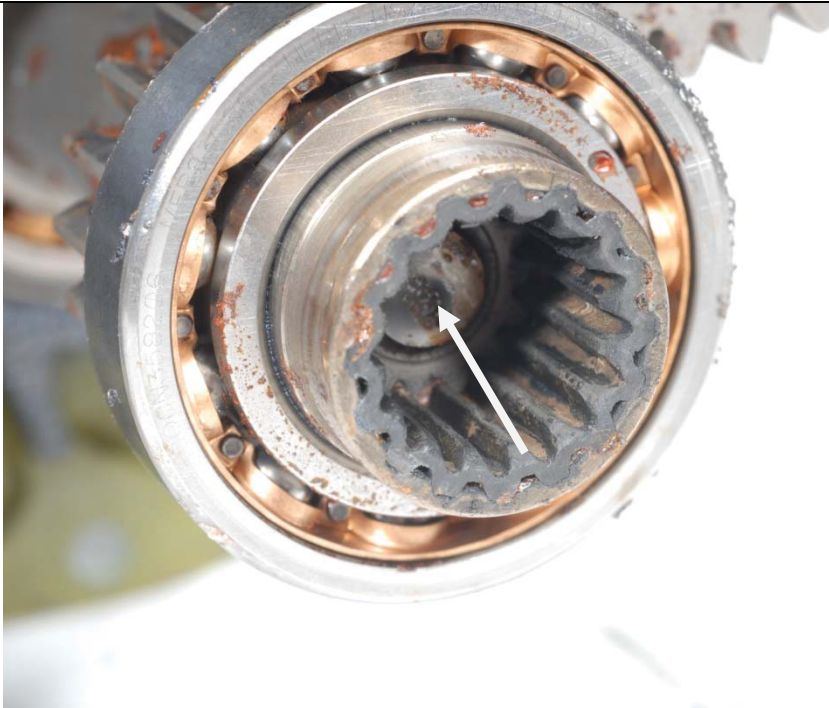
P-79297C, Hydraulic Pump Drive Gearshaft Assembly
